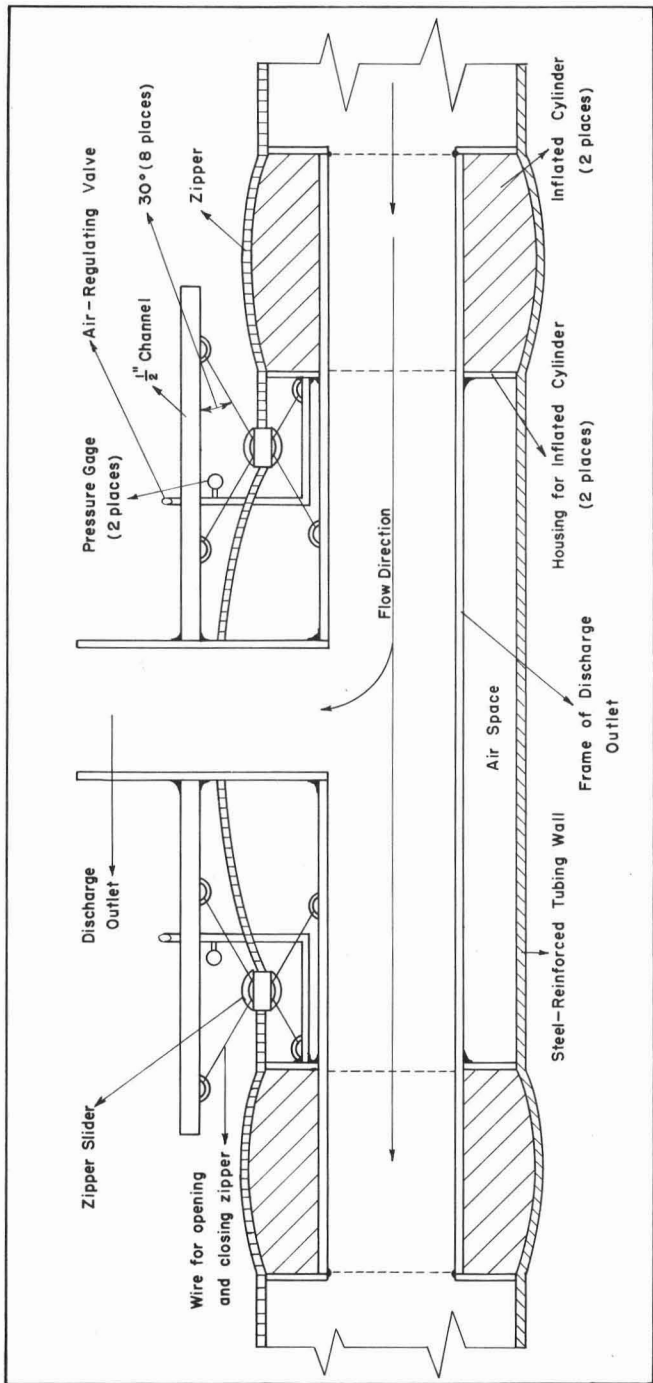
Cross section through discharge outlet of zippered pipe. Note position of inflatable cylinders and slider attachment at upper and lower surface of zipper. Zipper is opened at right-hand side and closed at left-hand side as the discharge outlet moves to the right, and vice versa.
